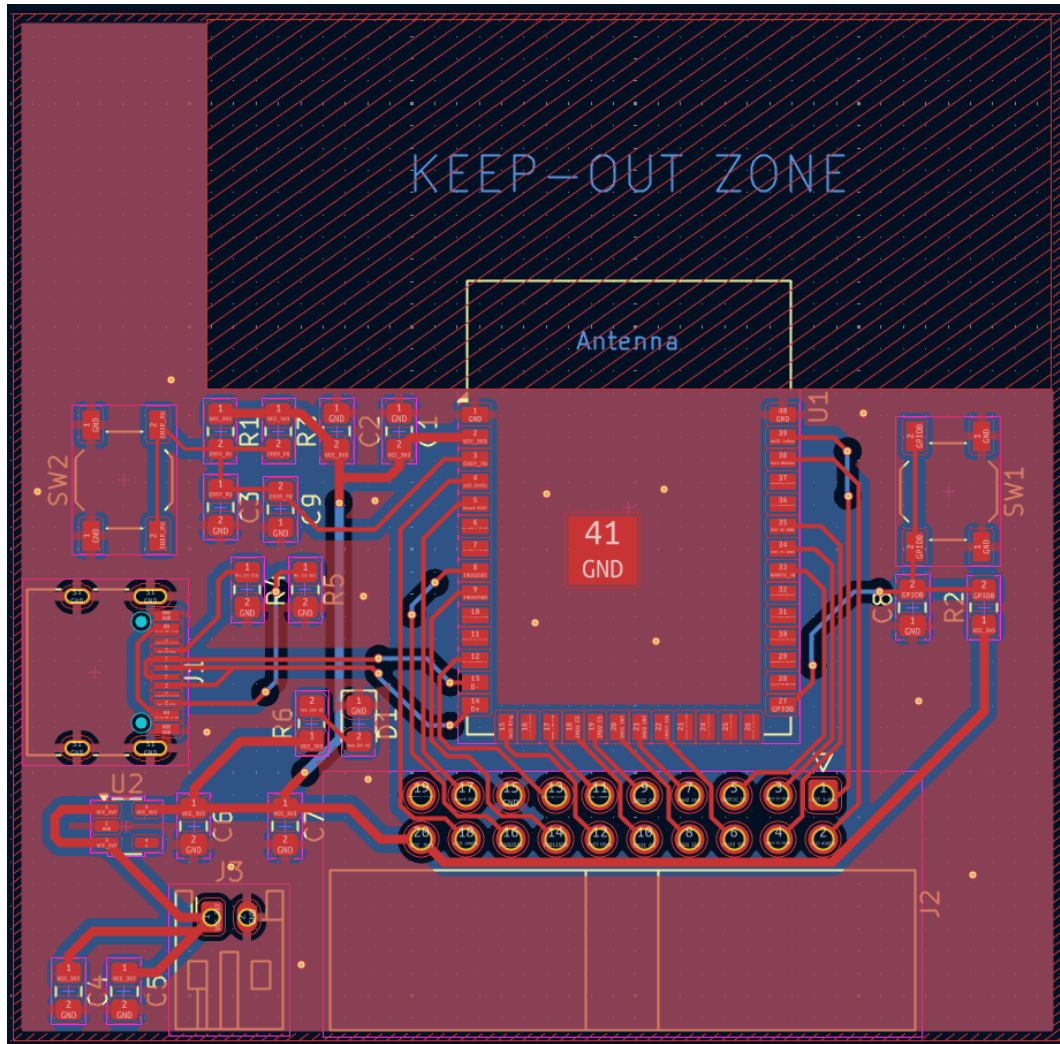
KiCad layout of the main controller PCB, showing routing and component placement.
